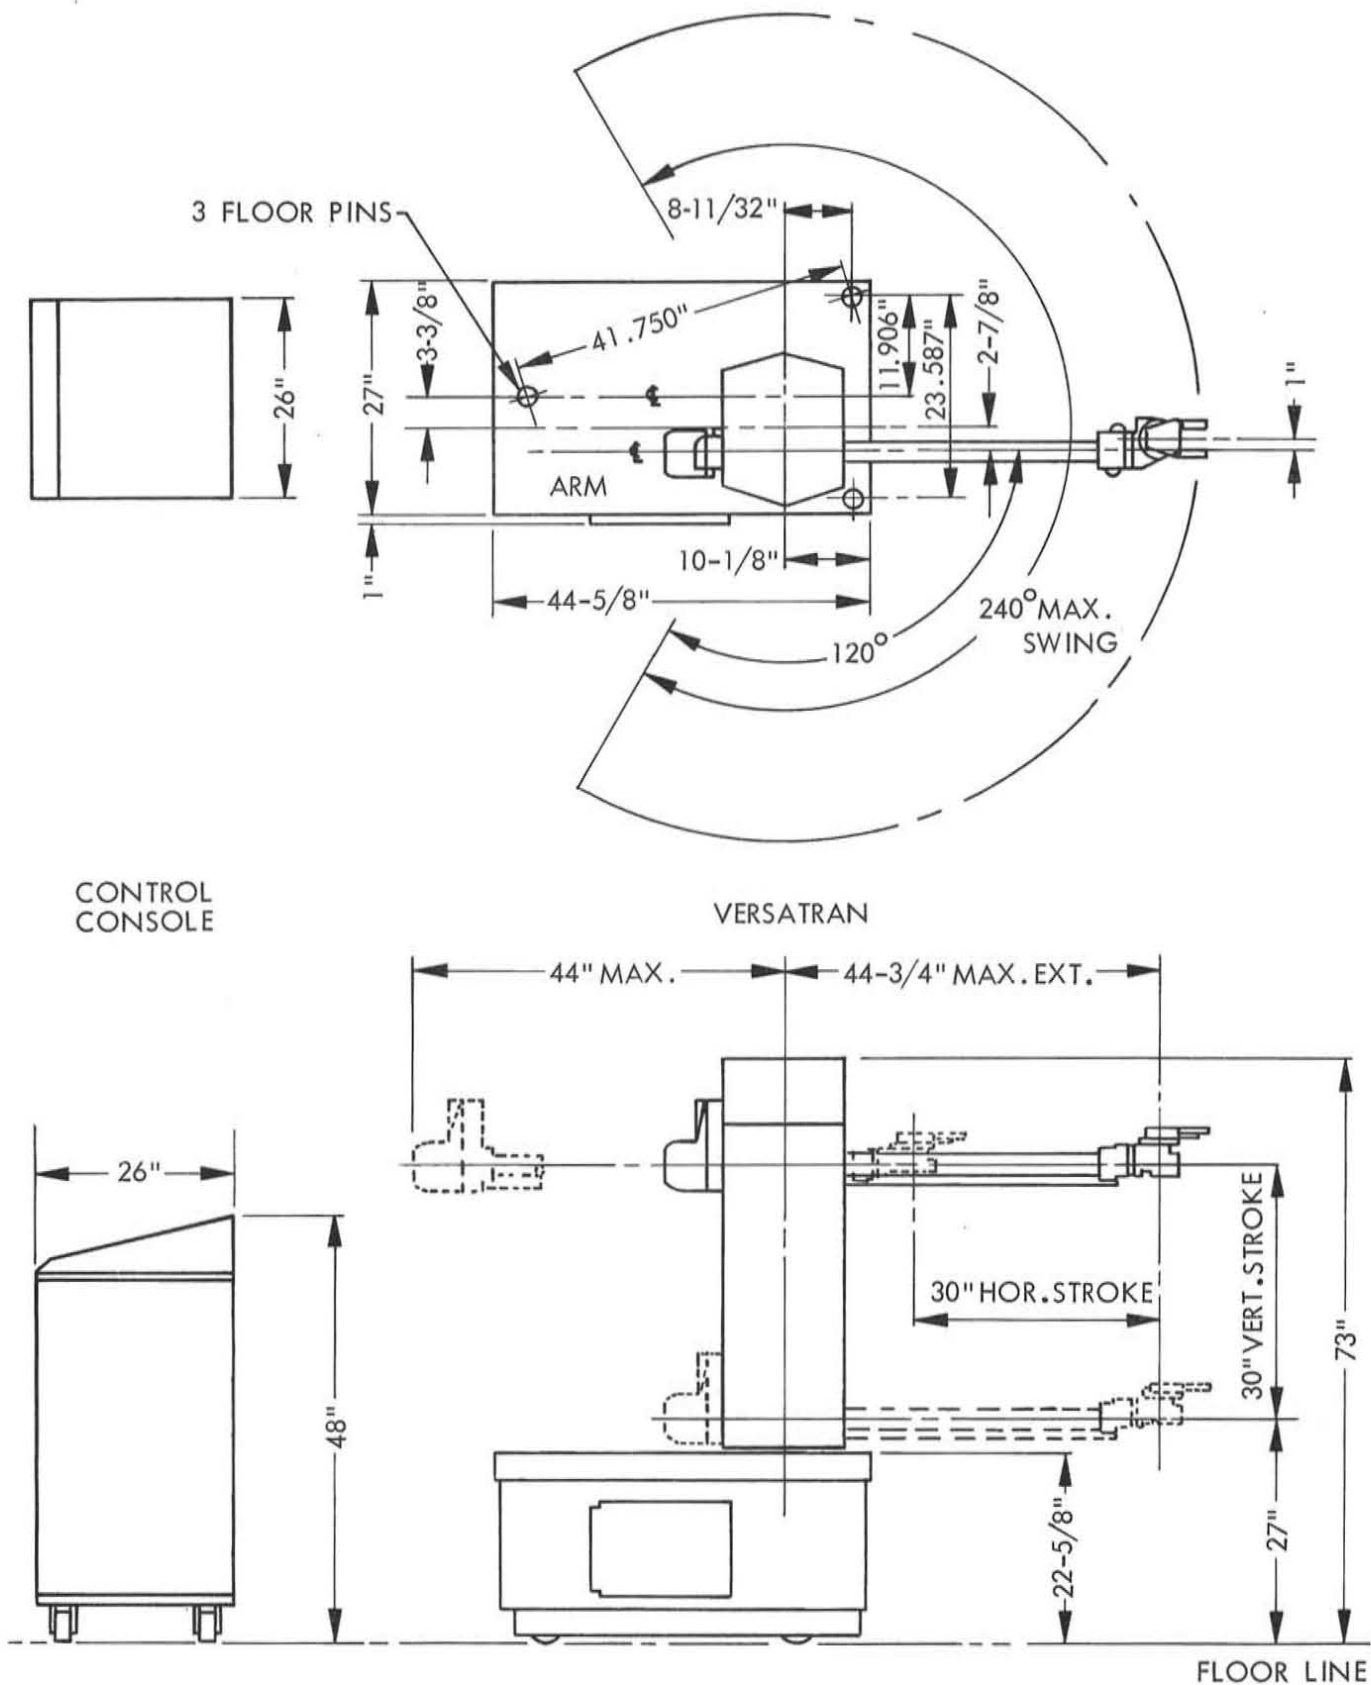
FLOOR PLAN — VERSATRAN AND CONTROL CONSOLE
